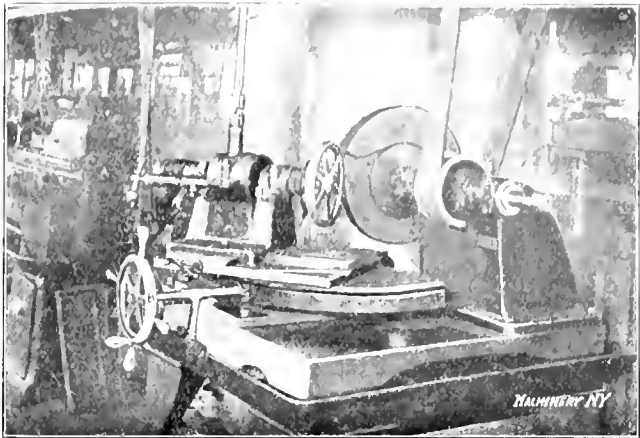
Special Machine for Grinding Rims of Hand-wheels
